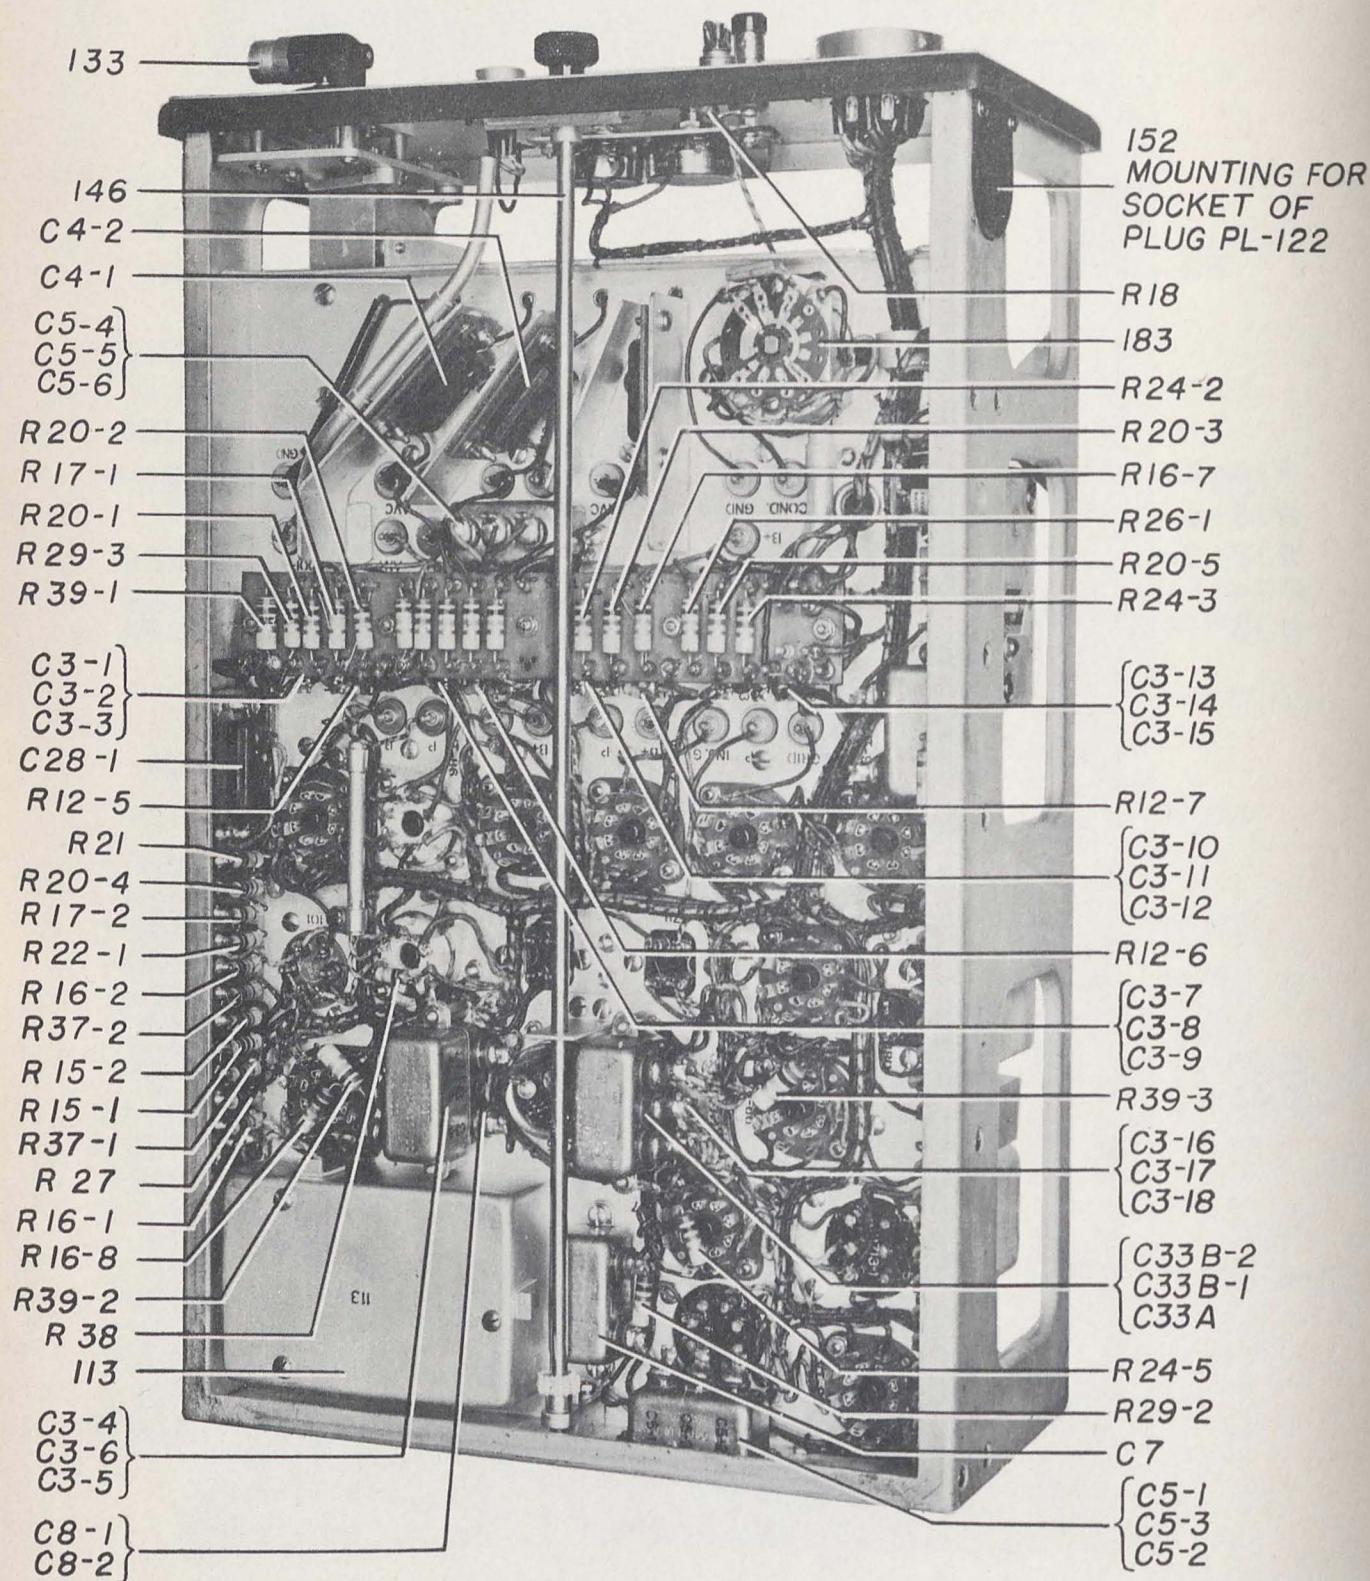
RADIO COMPASS UNIT BC-443-A, RIGHT BOTTOM VIEW OF CHASSIS
